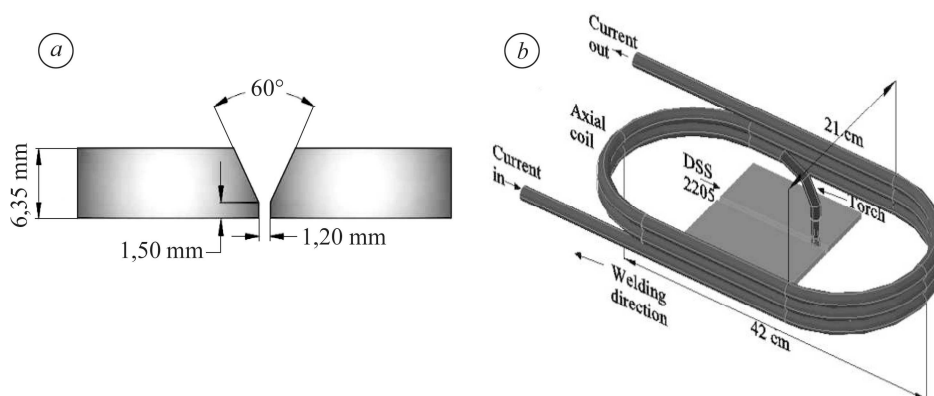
Single V groove joint preparation (a) and experimental welding setup (b).
